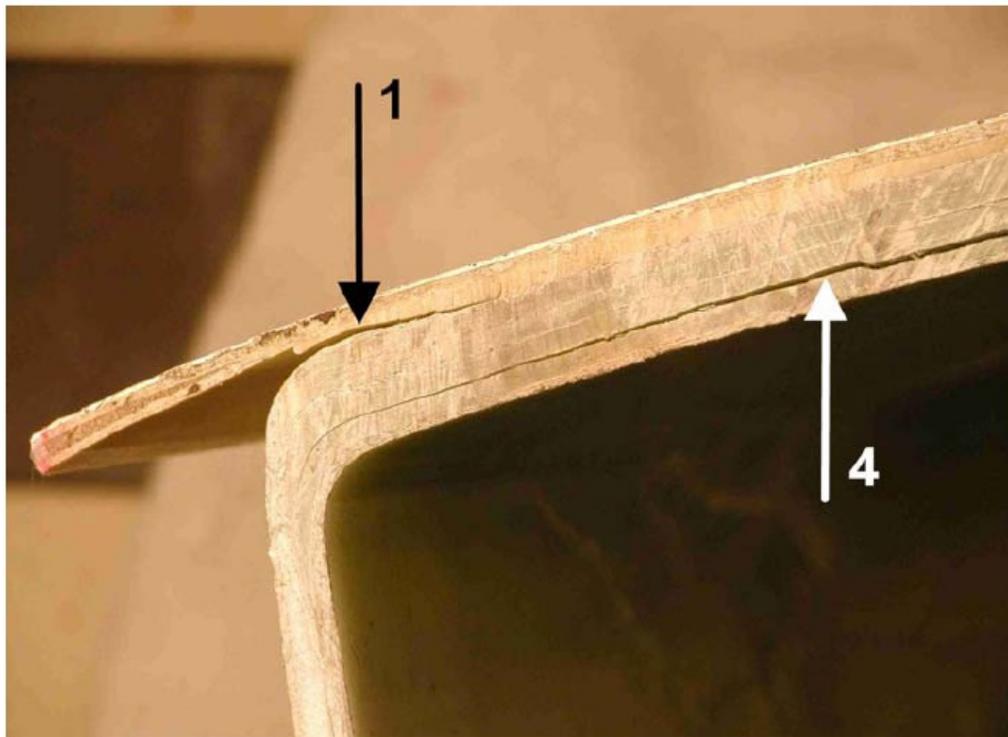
Illustration of damage in downwind skin and main spar of composite wind turbine blade under flap-wise bending test. Damage type1: main spar flange/adhesive layer debonding, type 4: delamination driven by a buckling load [37].
